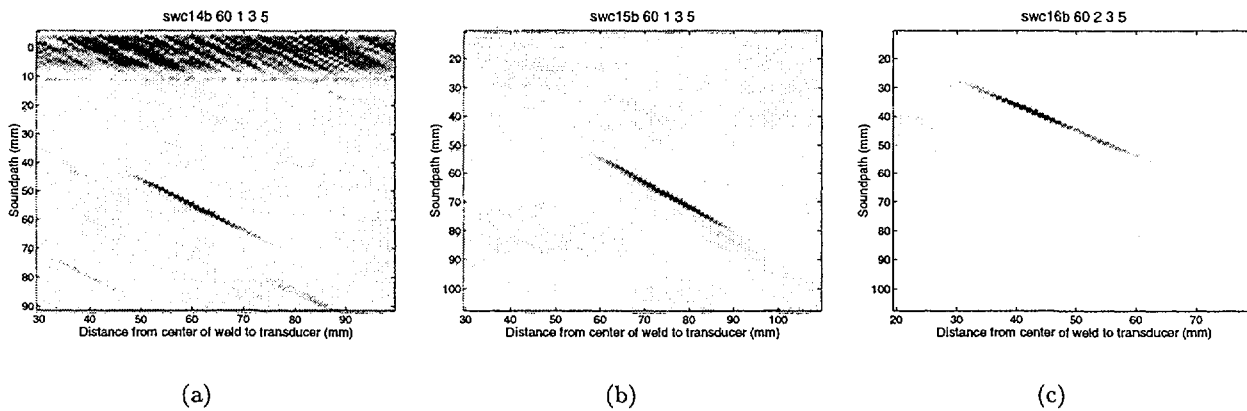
Backside measurements from sidewall cracks using the 60-degree 3.5 MHz transducer (a) 3 mm crack, 24 mm from bottom surface (b) 7 mm crack, 29 mm from bottom surface (c) 7 mm crack, 17 mm from bottom surface.
